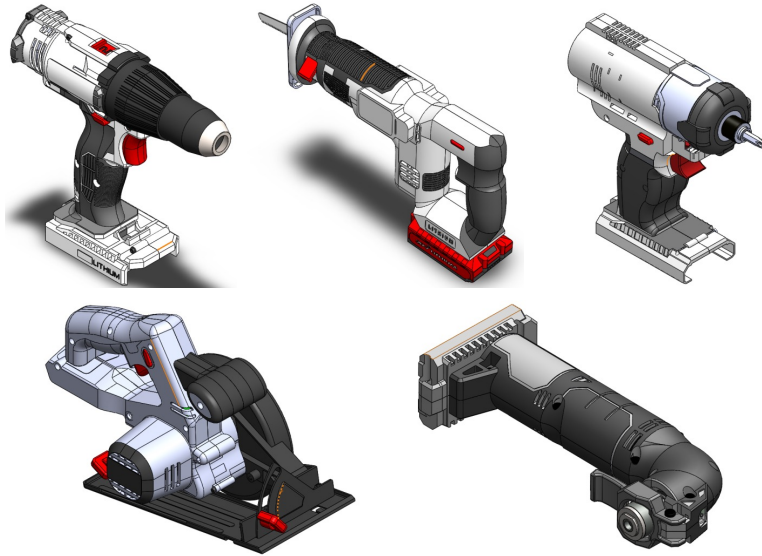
Assemblies of the set of Porter Cable hand tools produced by students
